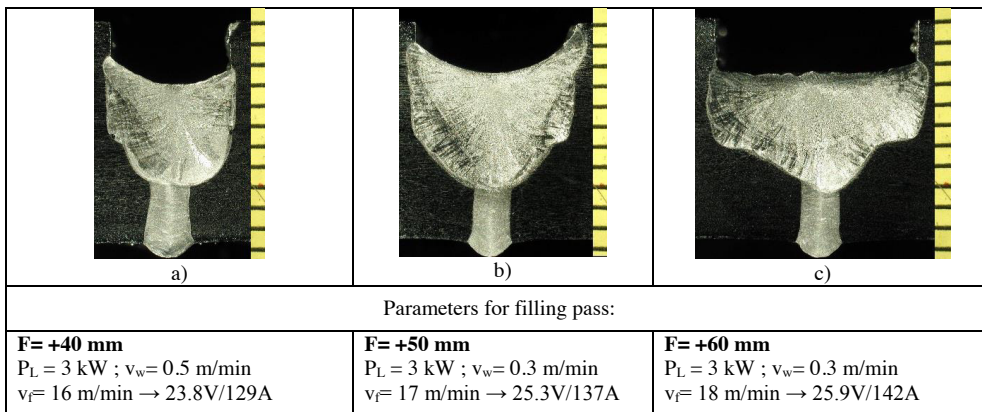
Macro cross-sections from the defocusing trials applied to laser-arc hybrid welding of different groove gaps.
